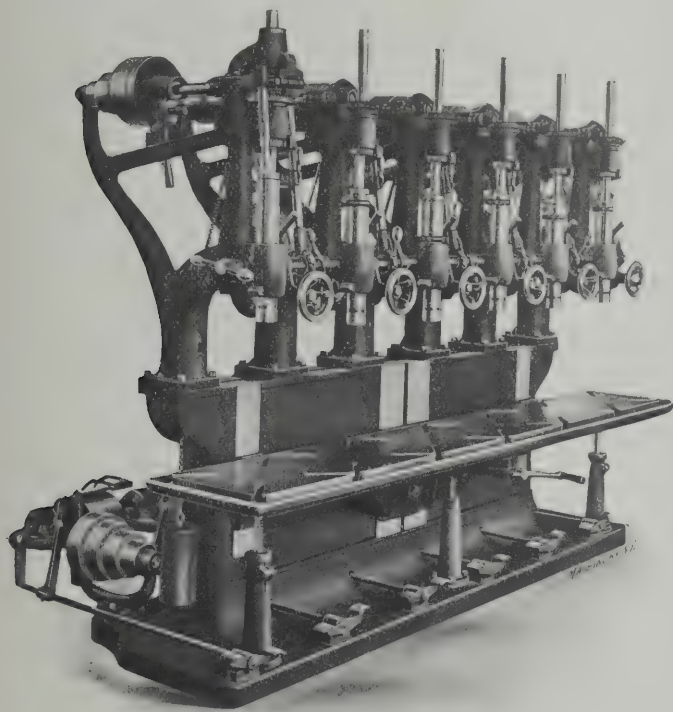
Twenty-inch Six-spindle Gang Drill, built by the Mechanics' Machine Co., Rockford, Ill.
